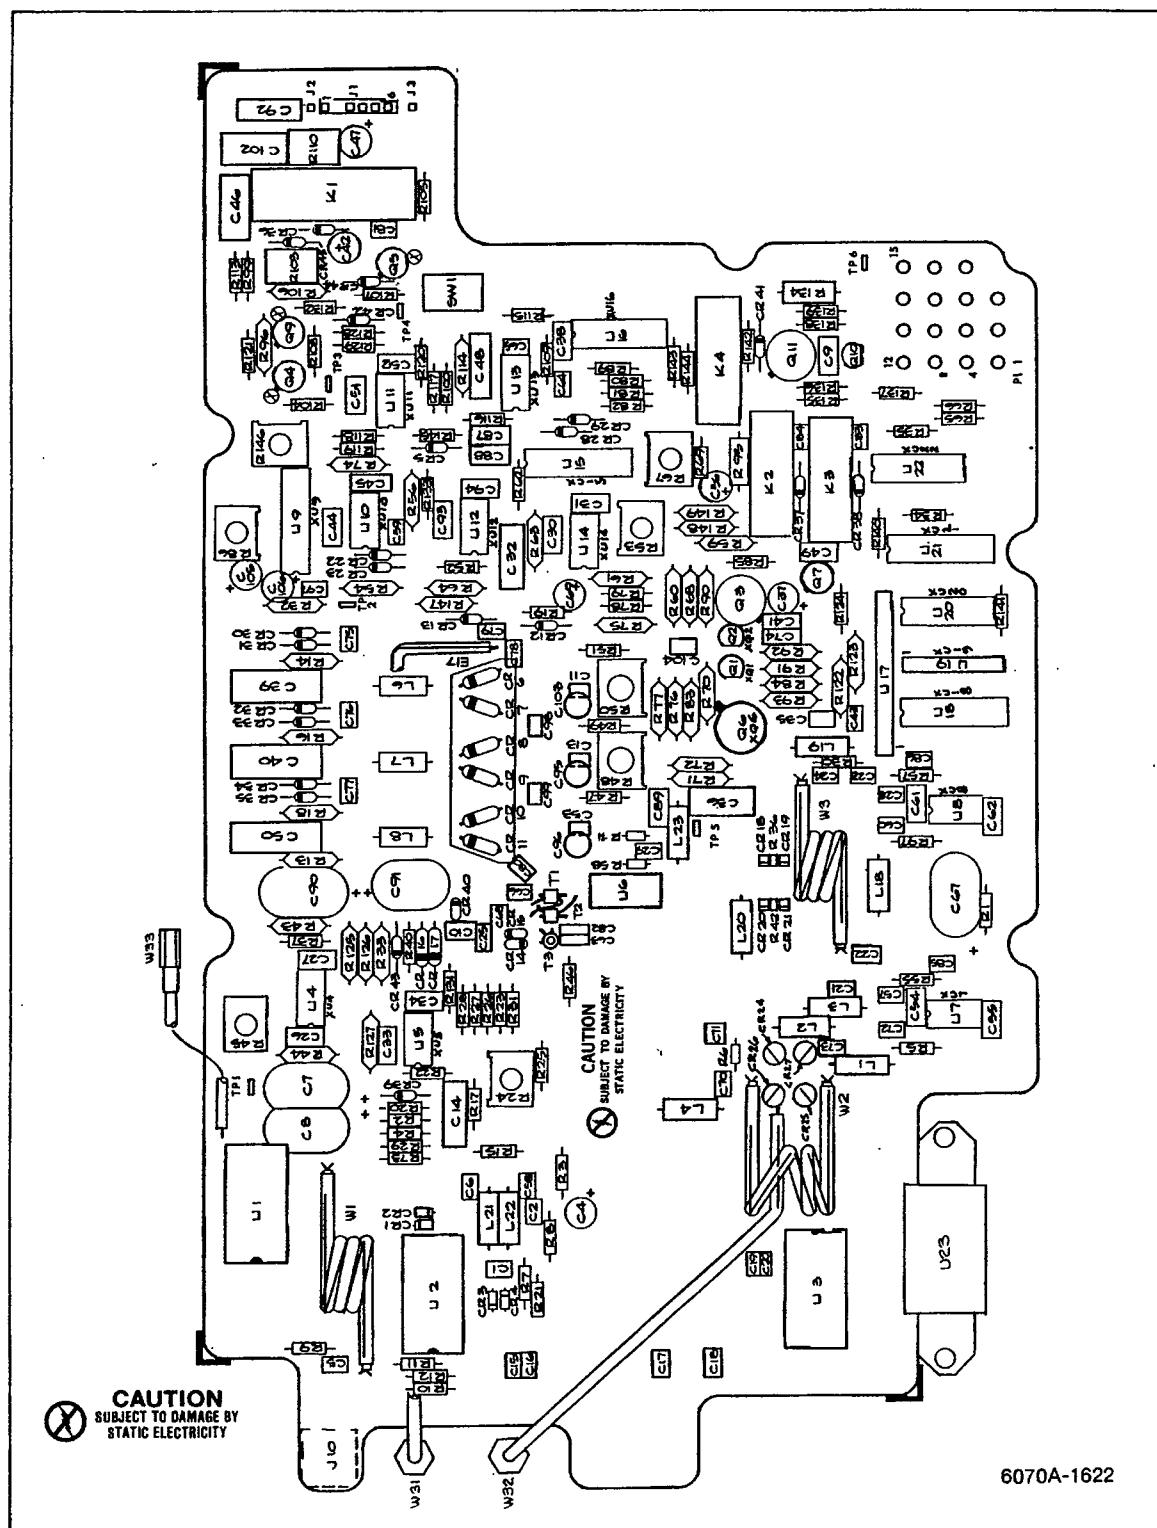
A3A3 Delay Discriminator PCB Assembly
